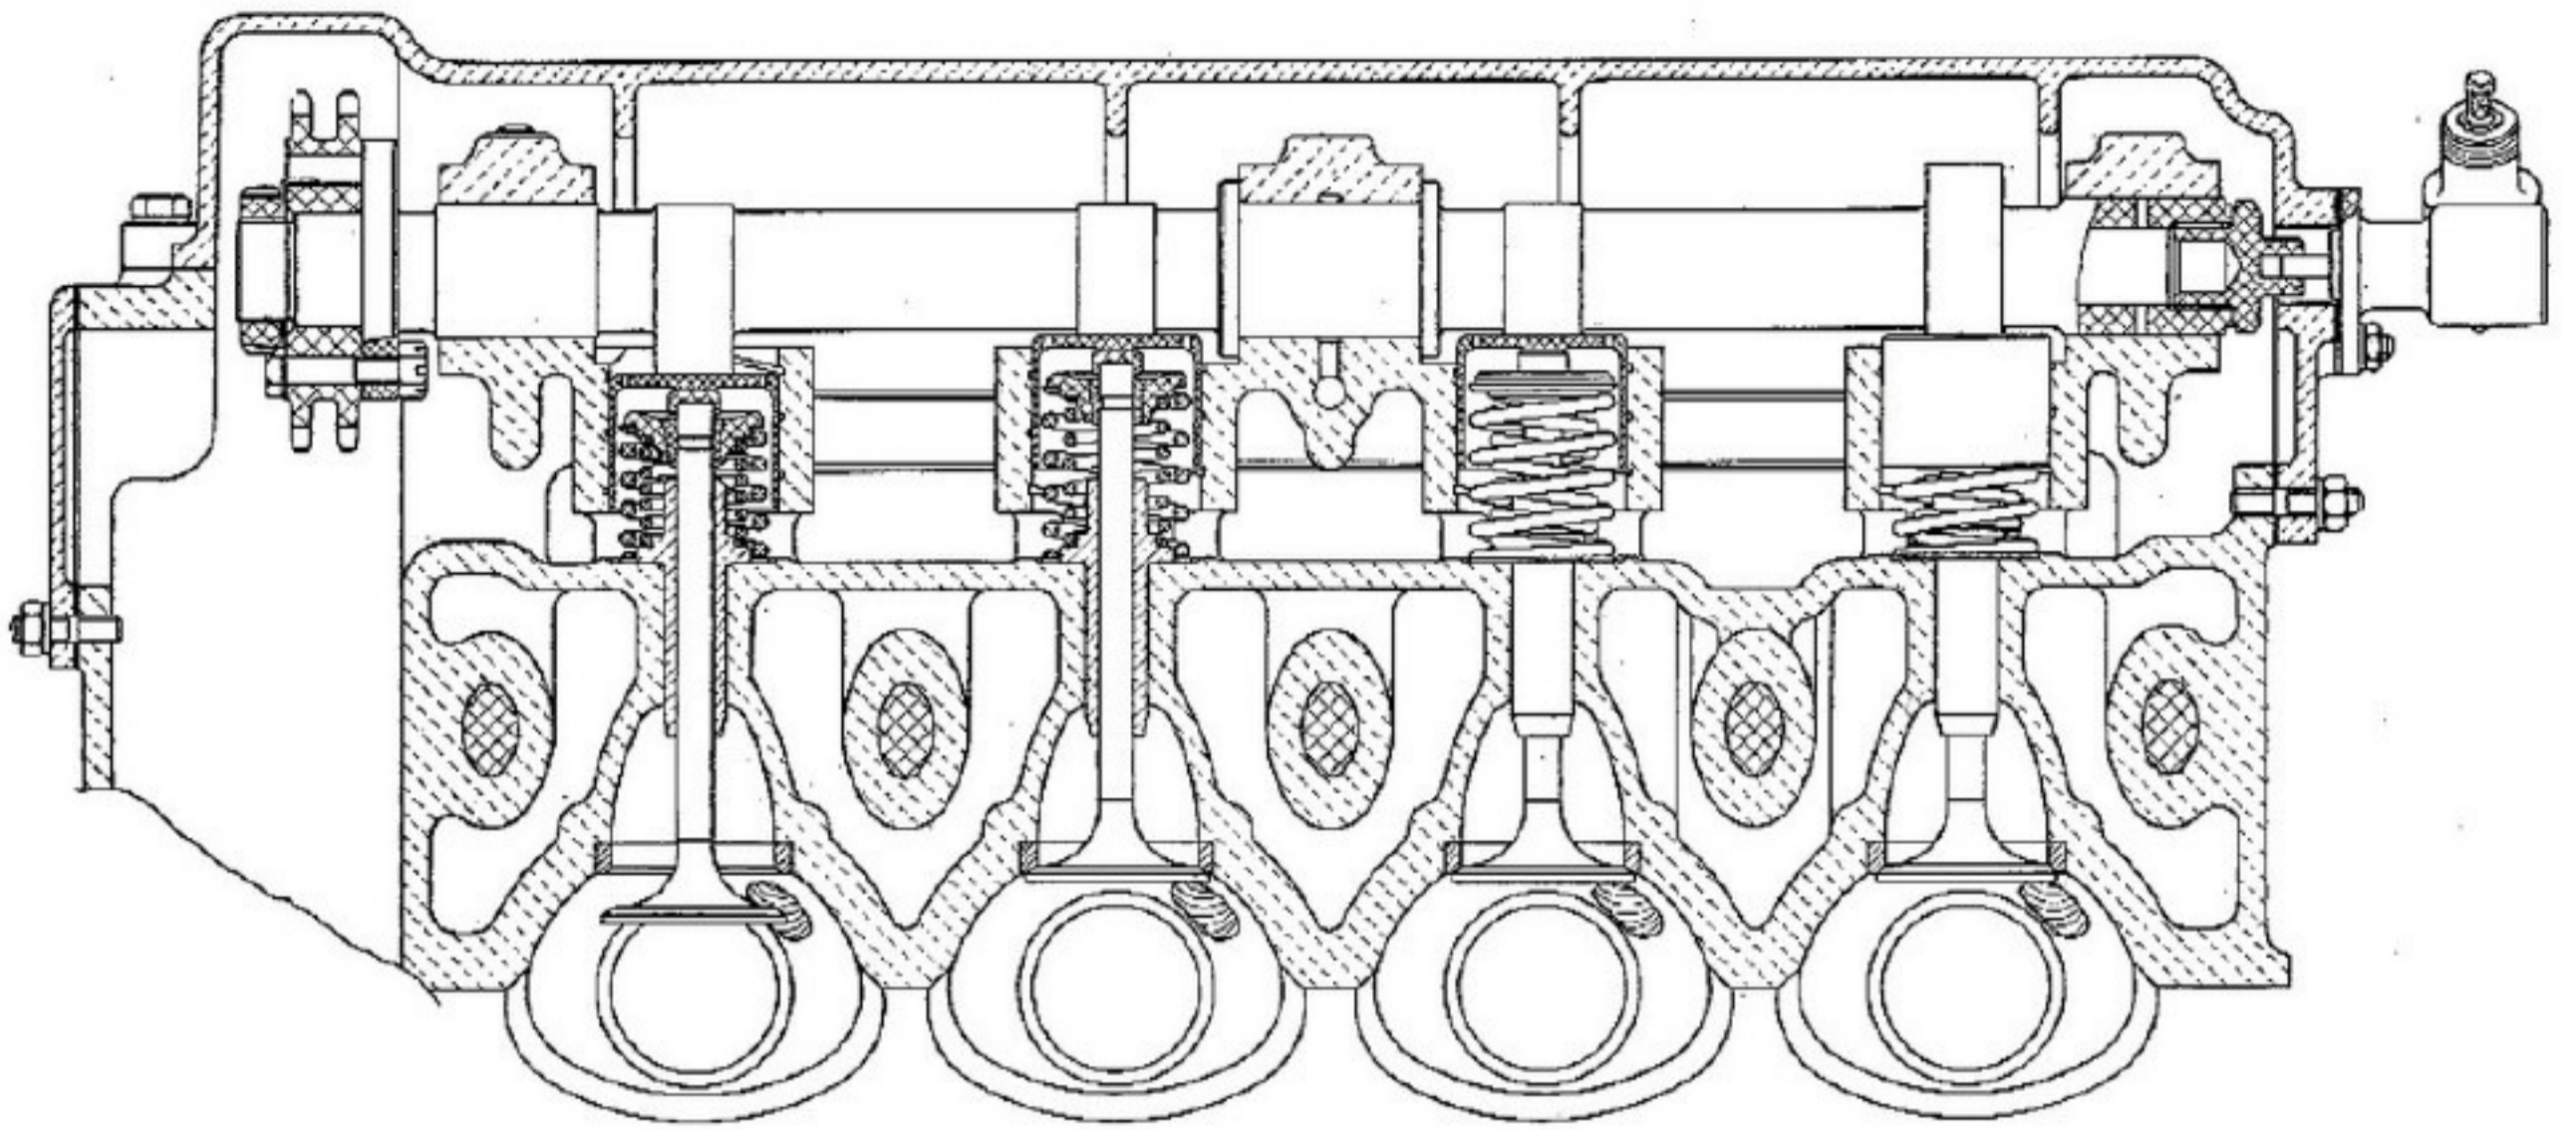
Cylinder head section through one of the camshafts and its valves.
